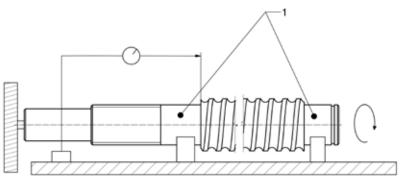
Measurement of the axial run-out $t_{\rm 8.2}$ of the bearing surfaces
